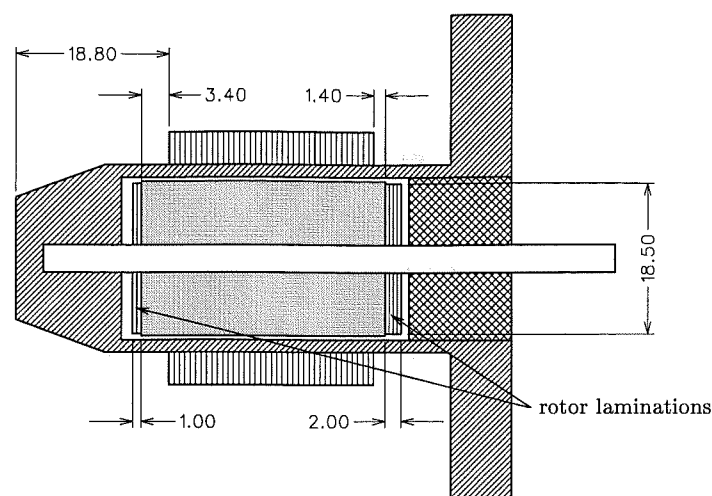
Section through the stator d-axis of design A. Dimensions in mm.
